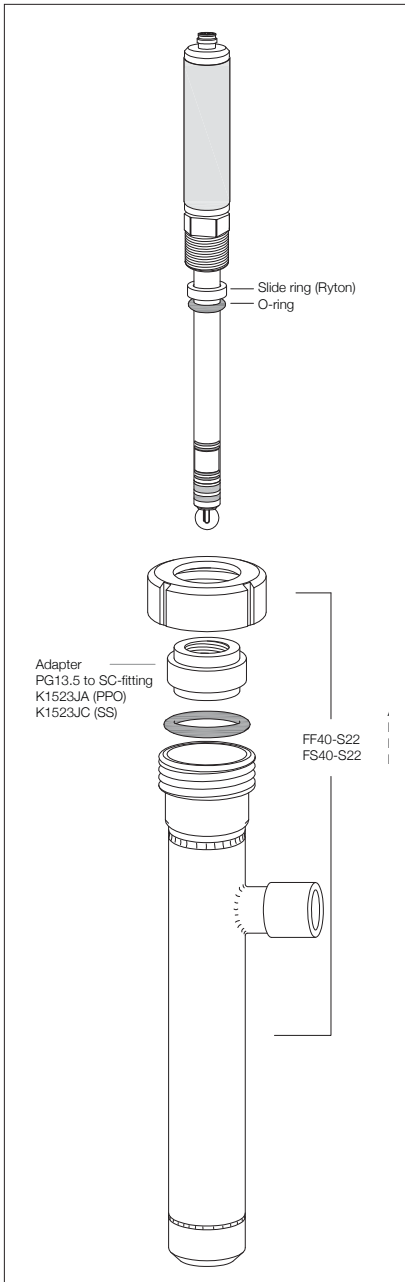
Mounting of sensor in metal FF40 fitting, using adapter K1523JA / K1523JC
